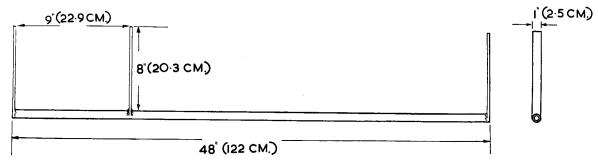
Jig for checking the alignment of the front and rear propeller shafts.
